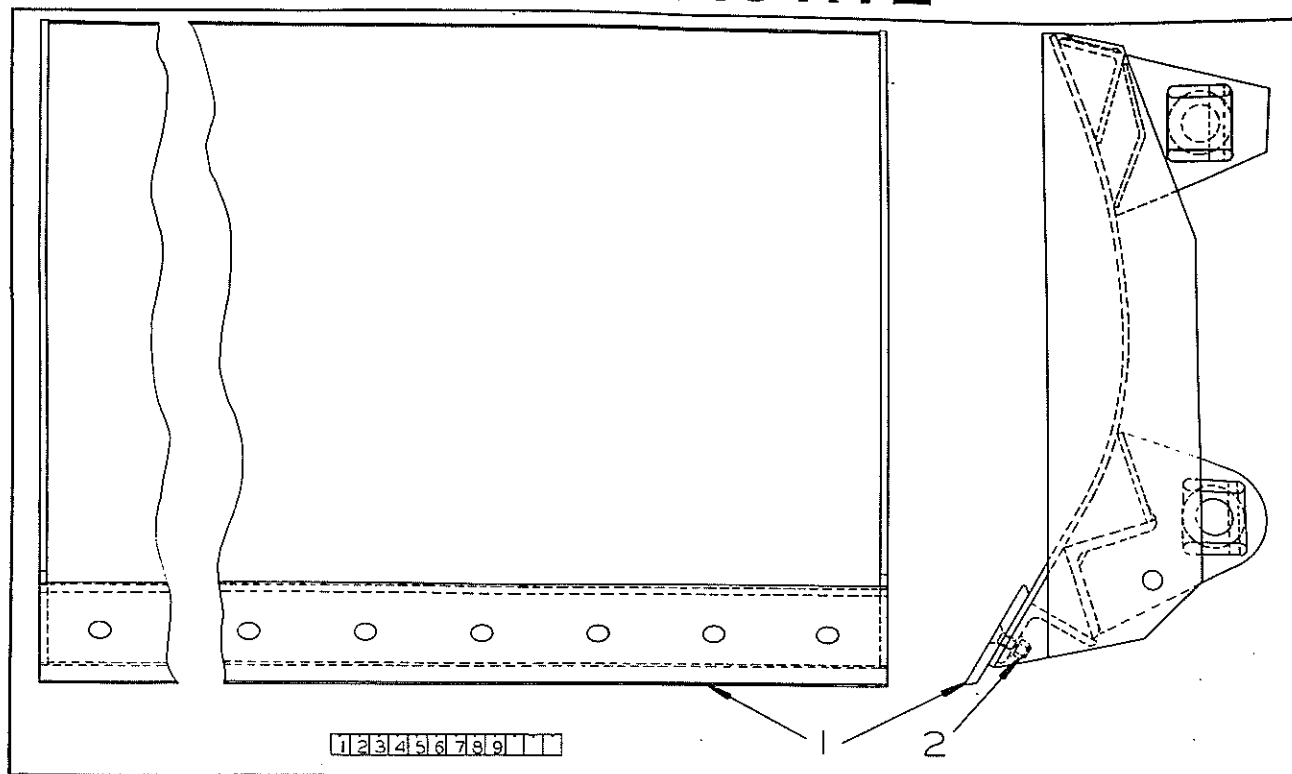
TRACTO-DOZER MOLDBOARD ASSEMBLY
